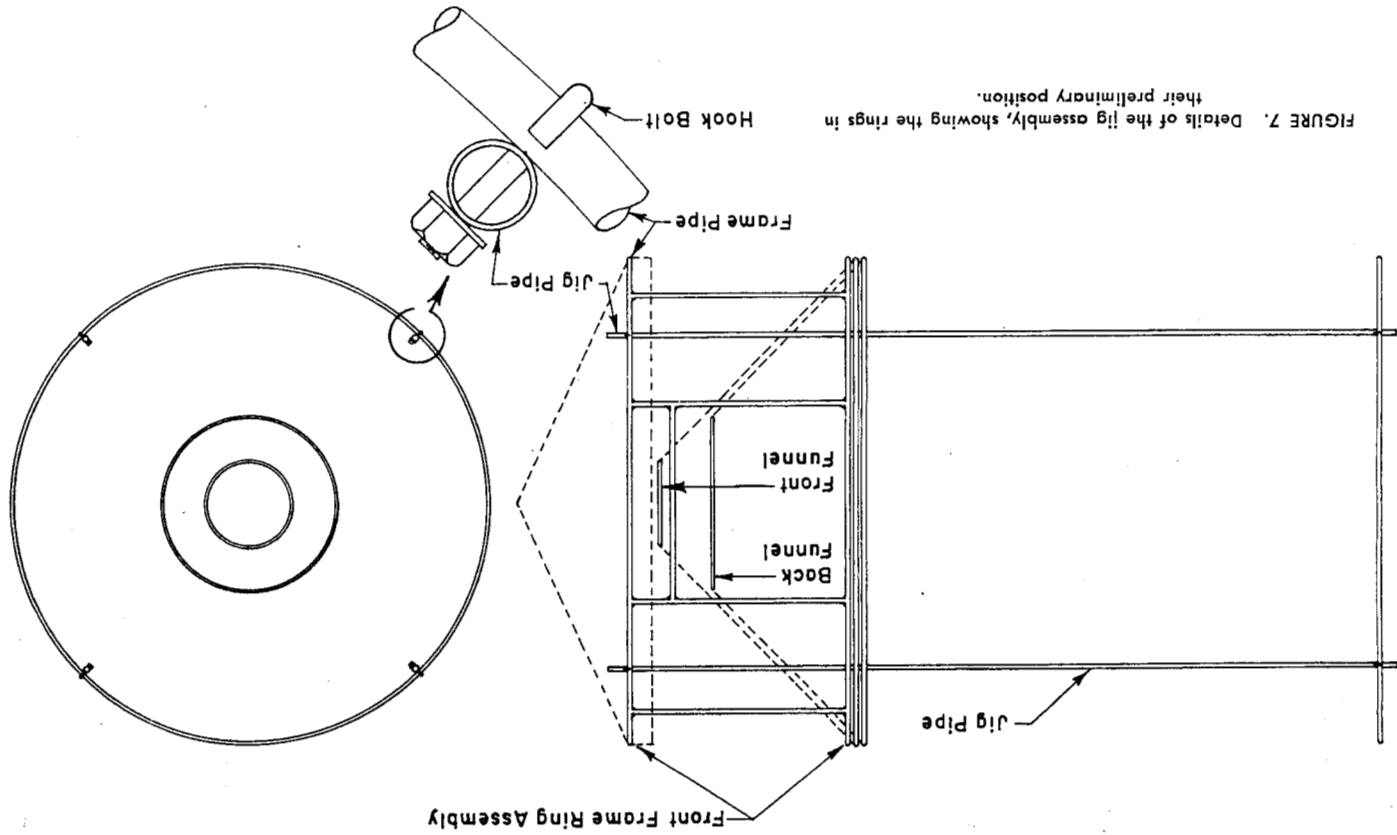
Details of the jig assembly, showing the rings in their preliminary position.
